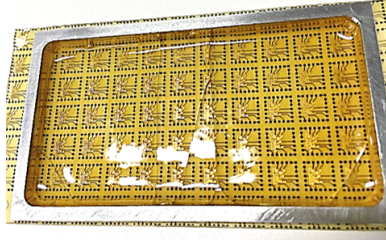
BCB mold cured in Al dam, resulted in fracture in mold
